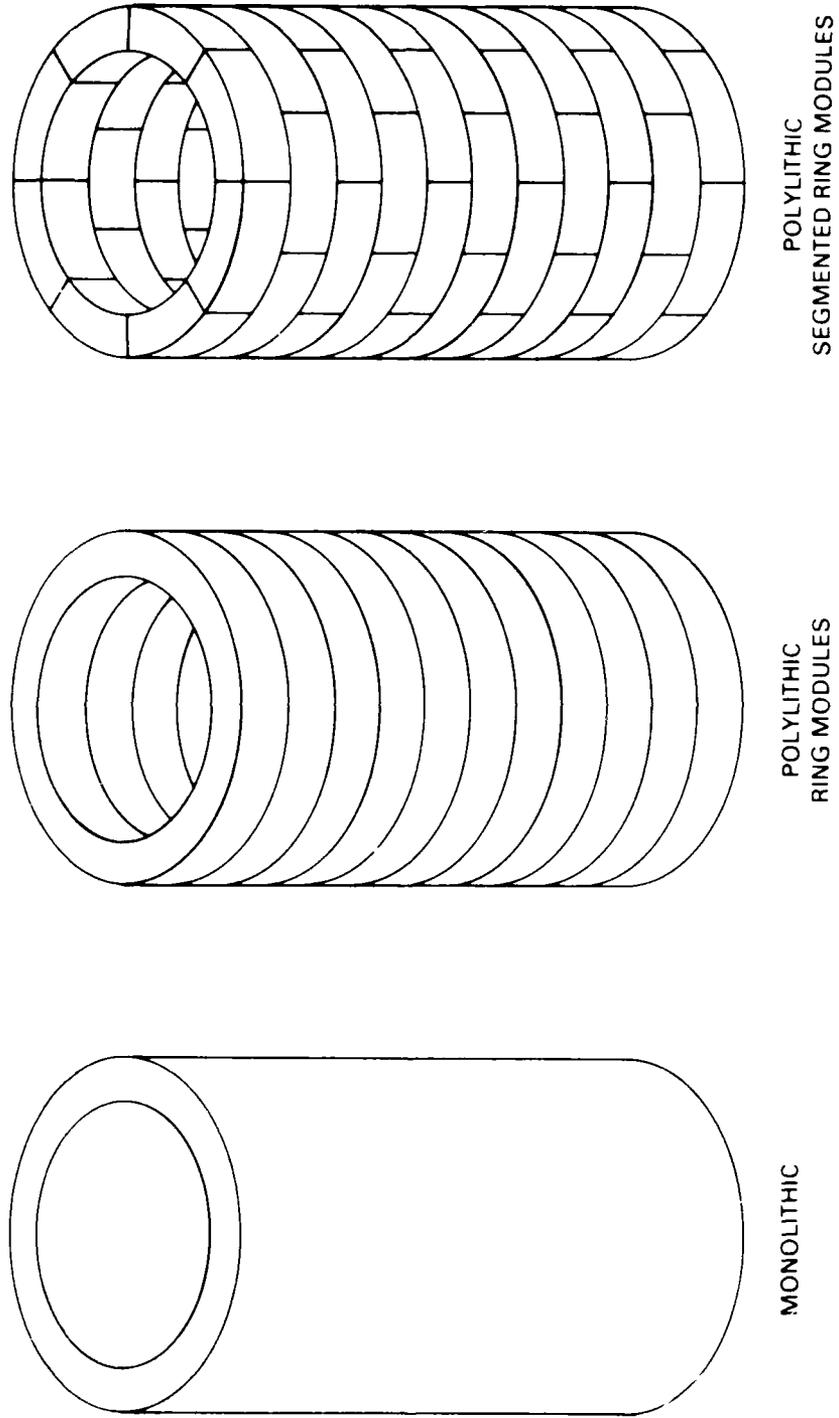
Techniques for fabrication of large diameter ceramic cylinders from structural modules joined by brazing with metallic solder.
